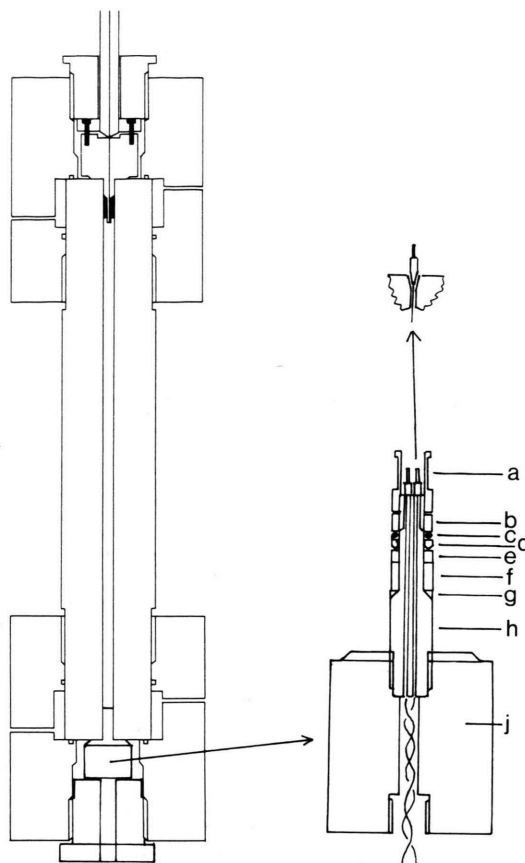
The pressure vessel used in the range 0–1 GPa. The closure plug and sealing rings are shown in detail: a) bayonet fitting for attachment of stainless steel guard tube; b) retaining collar; c) rubber O-ring; d) bronze ring; e) lead ring; f) leather ring; g) bronze anti-extrusion ring; h, j) stem and body of plug, made from ORVAR 2. The initial seal is made by the rubber ring c, and the sealing function passes successively to components e and f as the pressure is raised.
